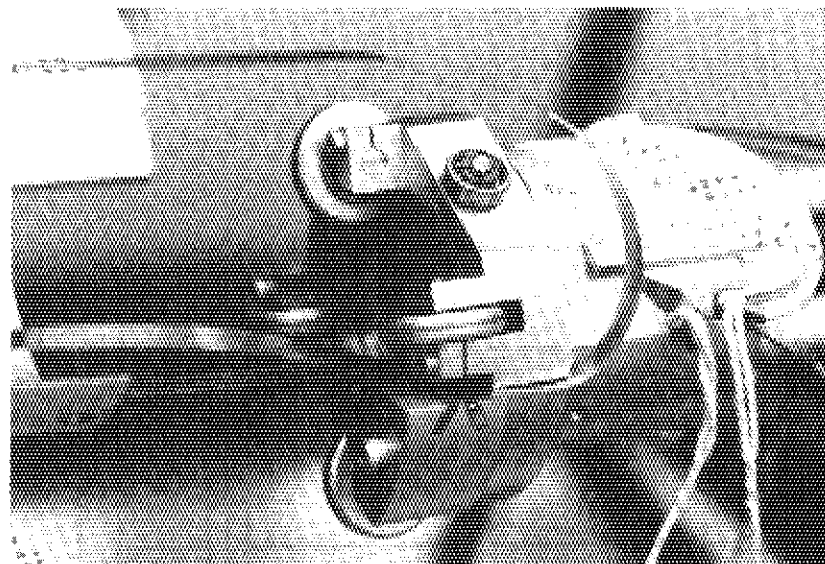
Azimuthal arm rotation unit of inner tube under disinsertion
